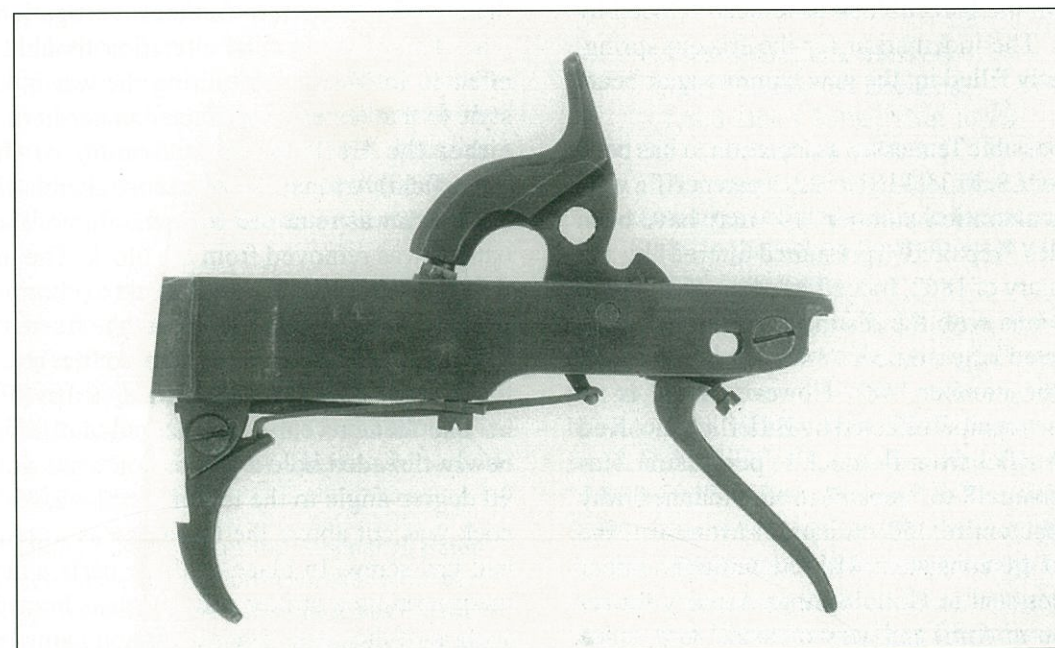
Close-up view showing breechblock removed, and mating number "14", of the rifle illustrated in Plate 17. (Dr. John M. Murphy Collection)
